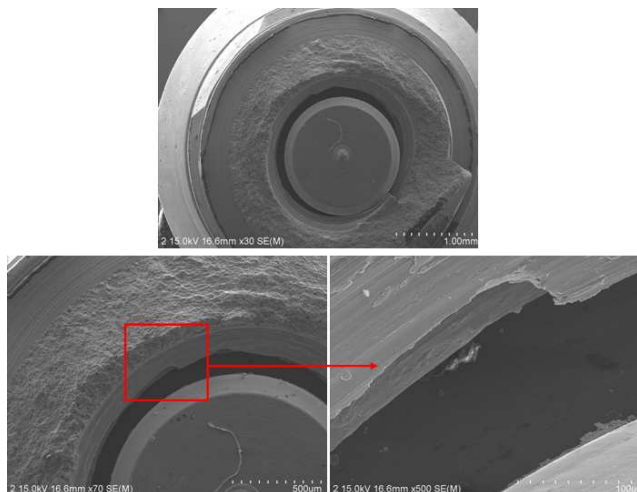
FE-SEM showing fractured non-coated implant system surface after 20 times tightening/loosening and corrosion test.
